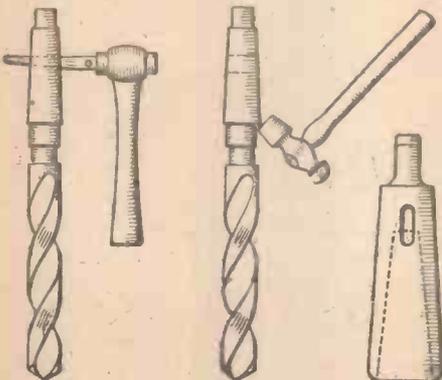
The right and wrong way to remove a taper drill sleeve.
